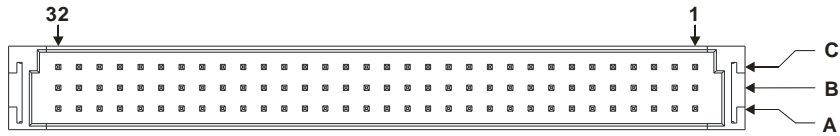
DIN 41612 (96-pin) Backplane Connector (Front View)
